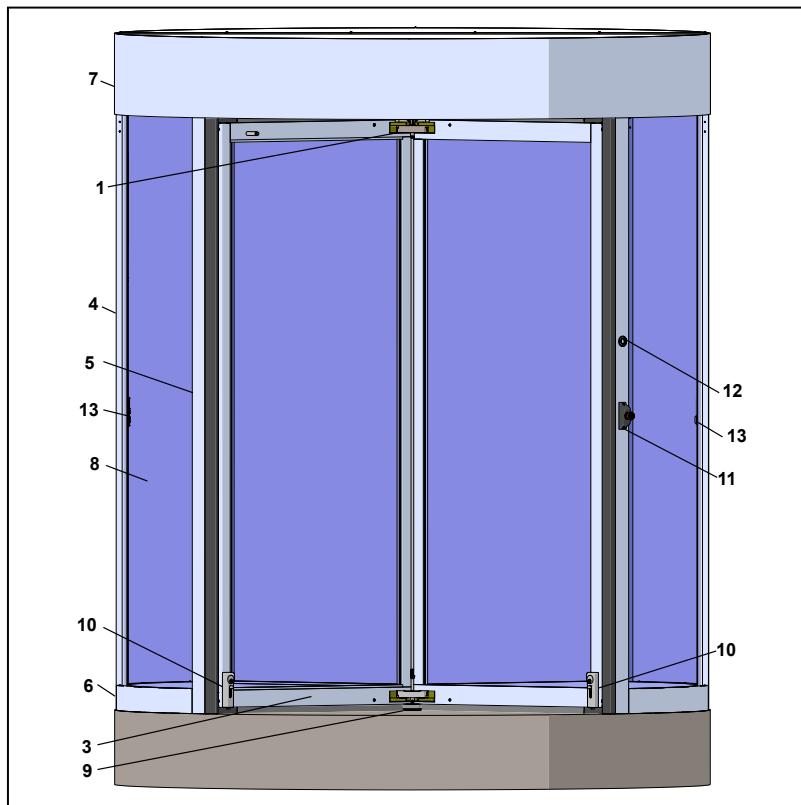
Enclosure quarter post/end wall assembly
